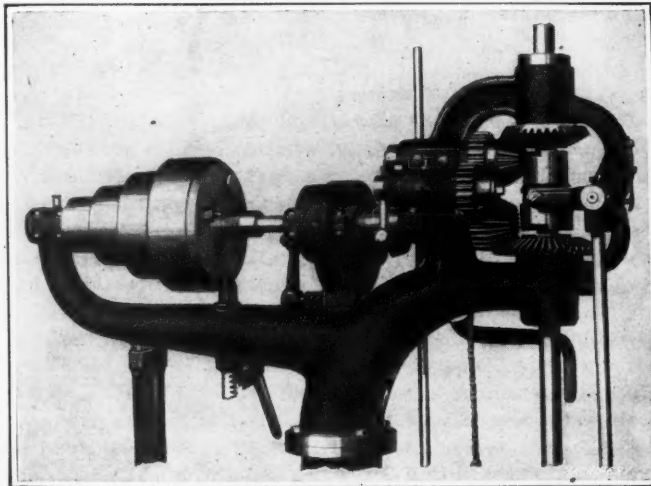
Close View of Arrangement of Gearing for Tapping Attachment
